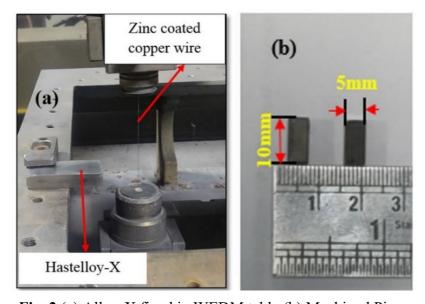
(a) Alloy-X fixed in WEDM table (b) Machined Piece
